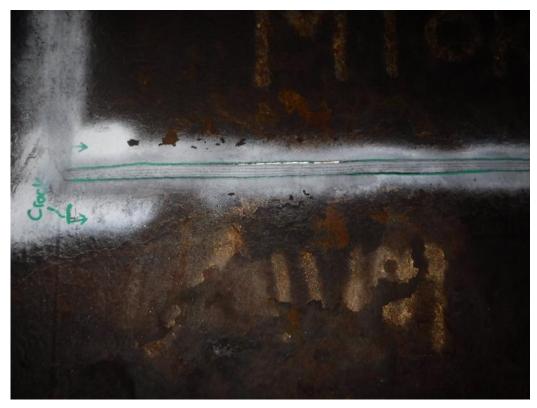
CRACKED WELD RIGHT SIDE OF CAN 106 NEAR SPRING LINE
